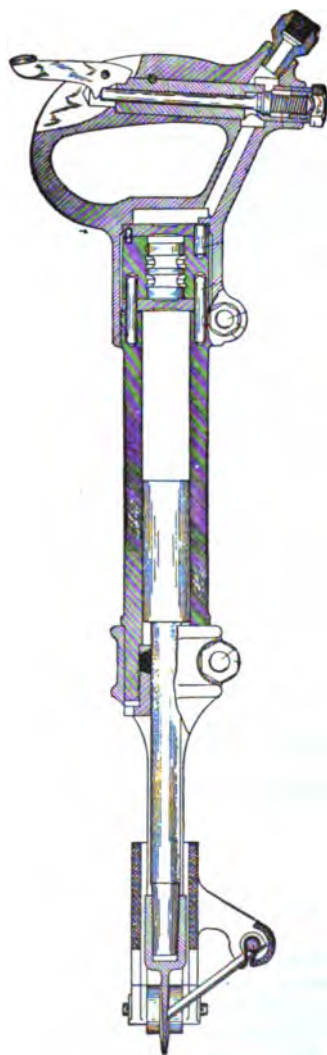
SEC. 10es.—Little David, type 13, calking machine.
